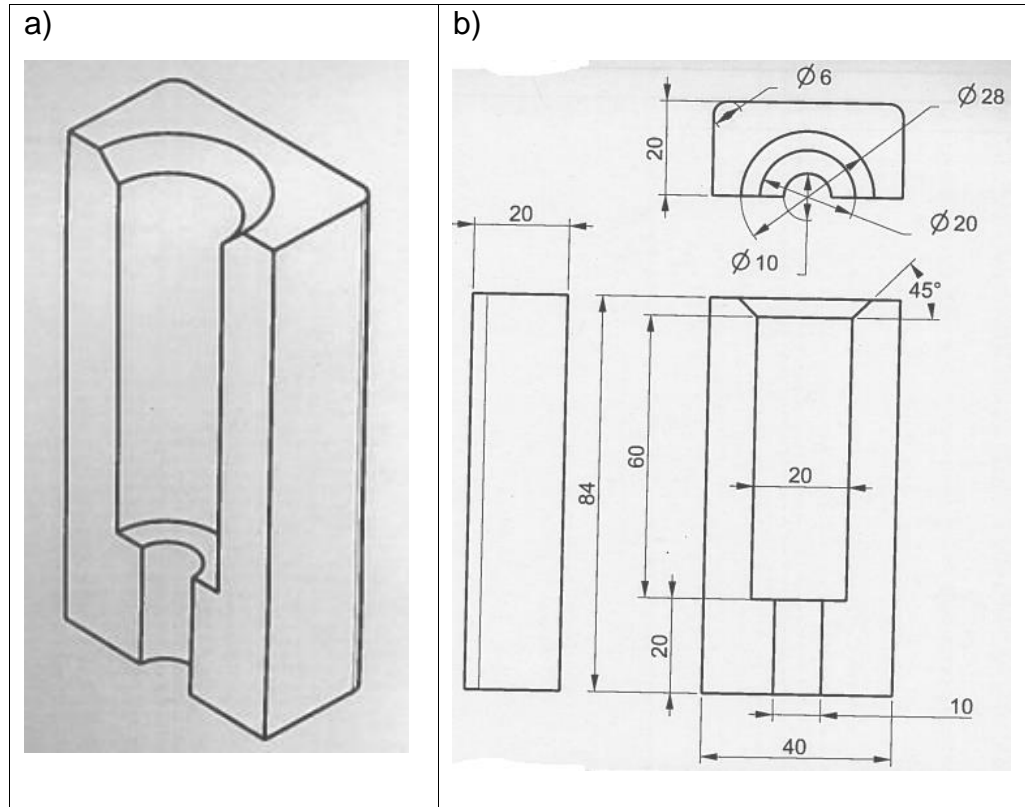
The hollow billet graphite mould design. Image a) shows a 3D drawing of the mould without the central rod inserted, b) displays the dimensions of the mould.
